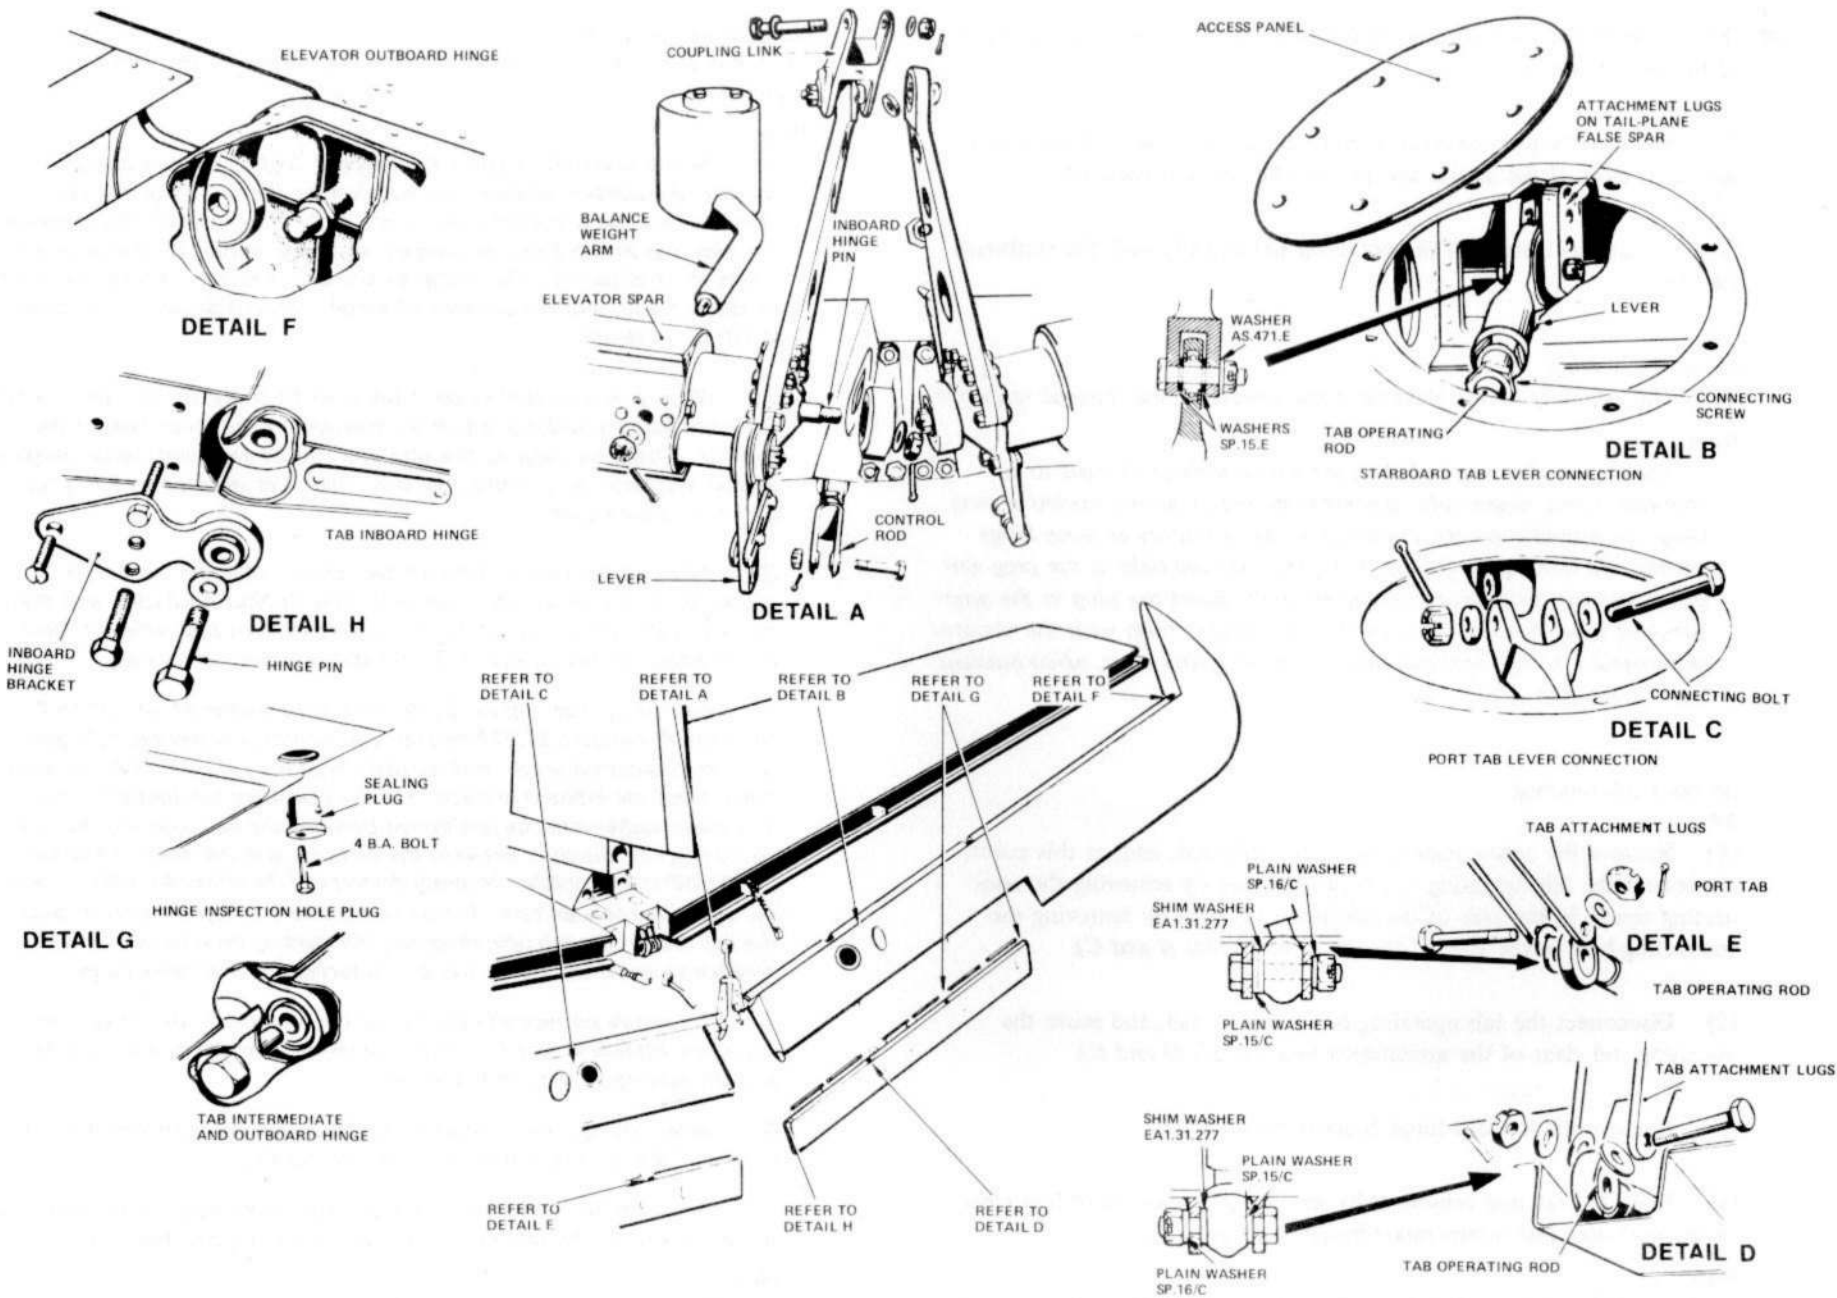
ELEVATOR AND ELEVATOR TAB REMOVAL
